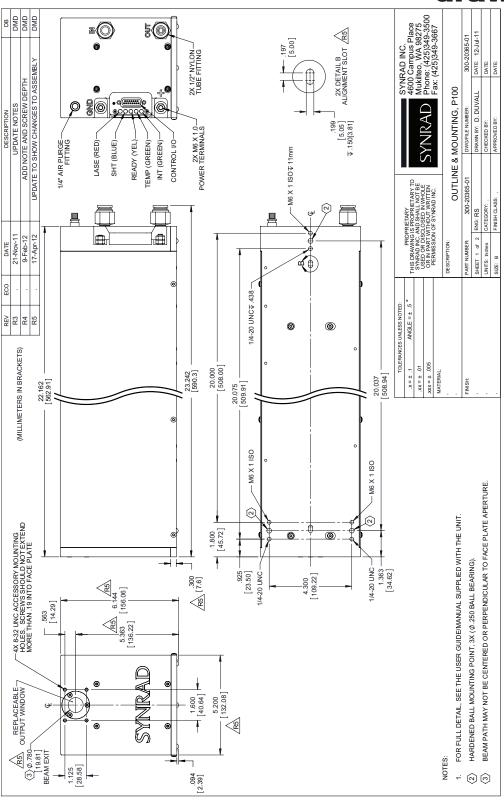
Pulstar p100 outline & mounting dimensions, sheet 1 of 2
